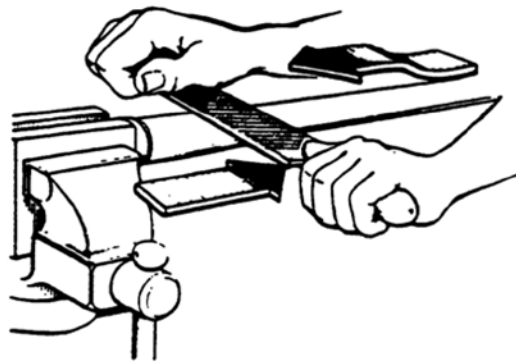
Draw filing will quickly remove pits from gun parts, but caution must be taken not to scratch the metal surface or take off too much metal.
